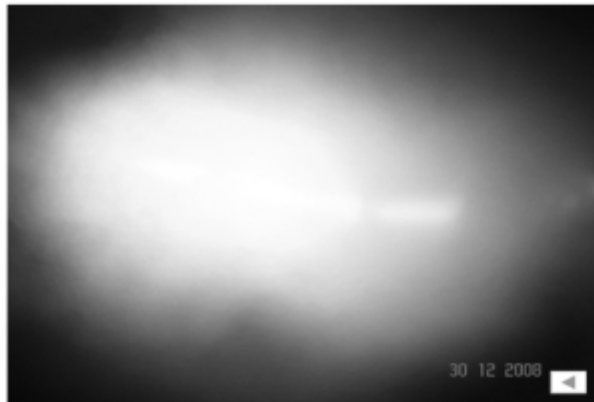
Torch Light was put inside the shroud through Drain Outlet. Light was seen across through the weld edge from the other side (air-vent connection), proving that there were weld defects .
